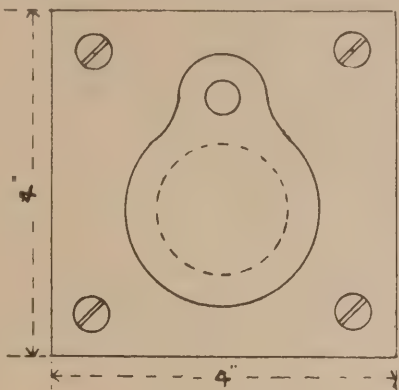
A. ELEVATION OF INSPECTION PLATE ON DOOR.
